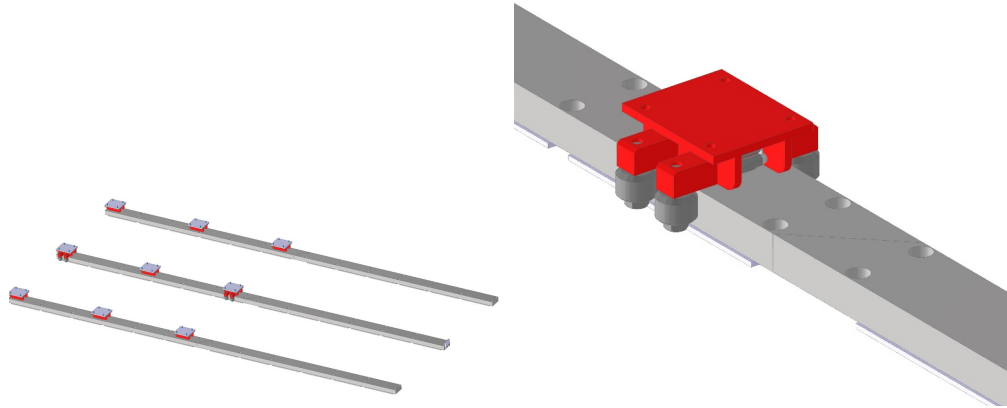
Drawing of the rails (left) and skates (right) for the moving system.
